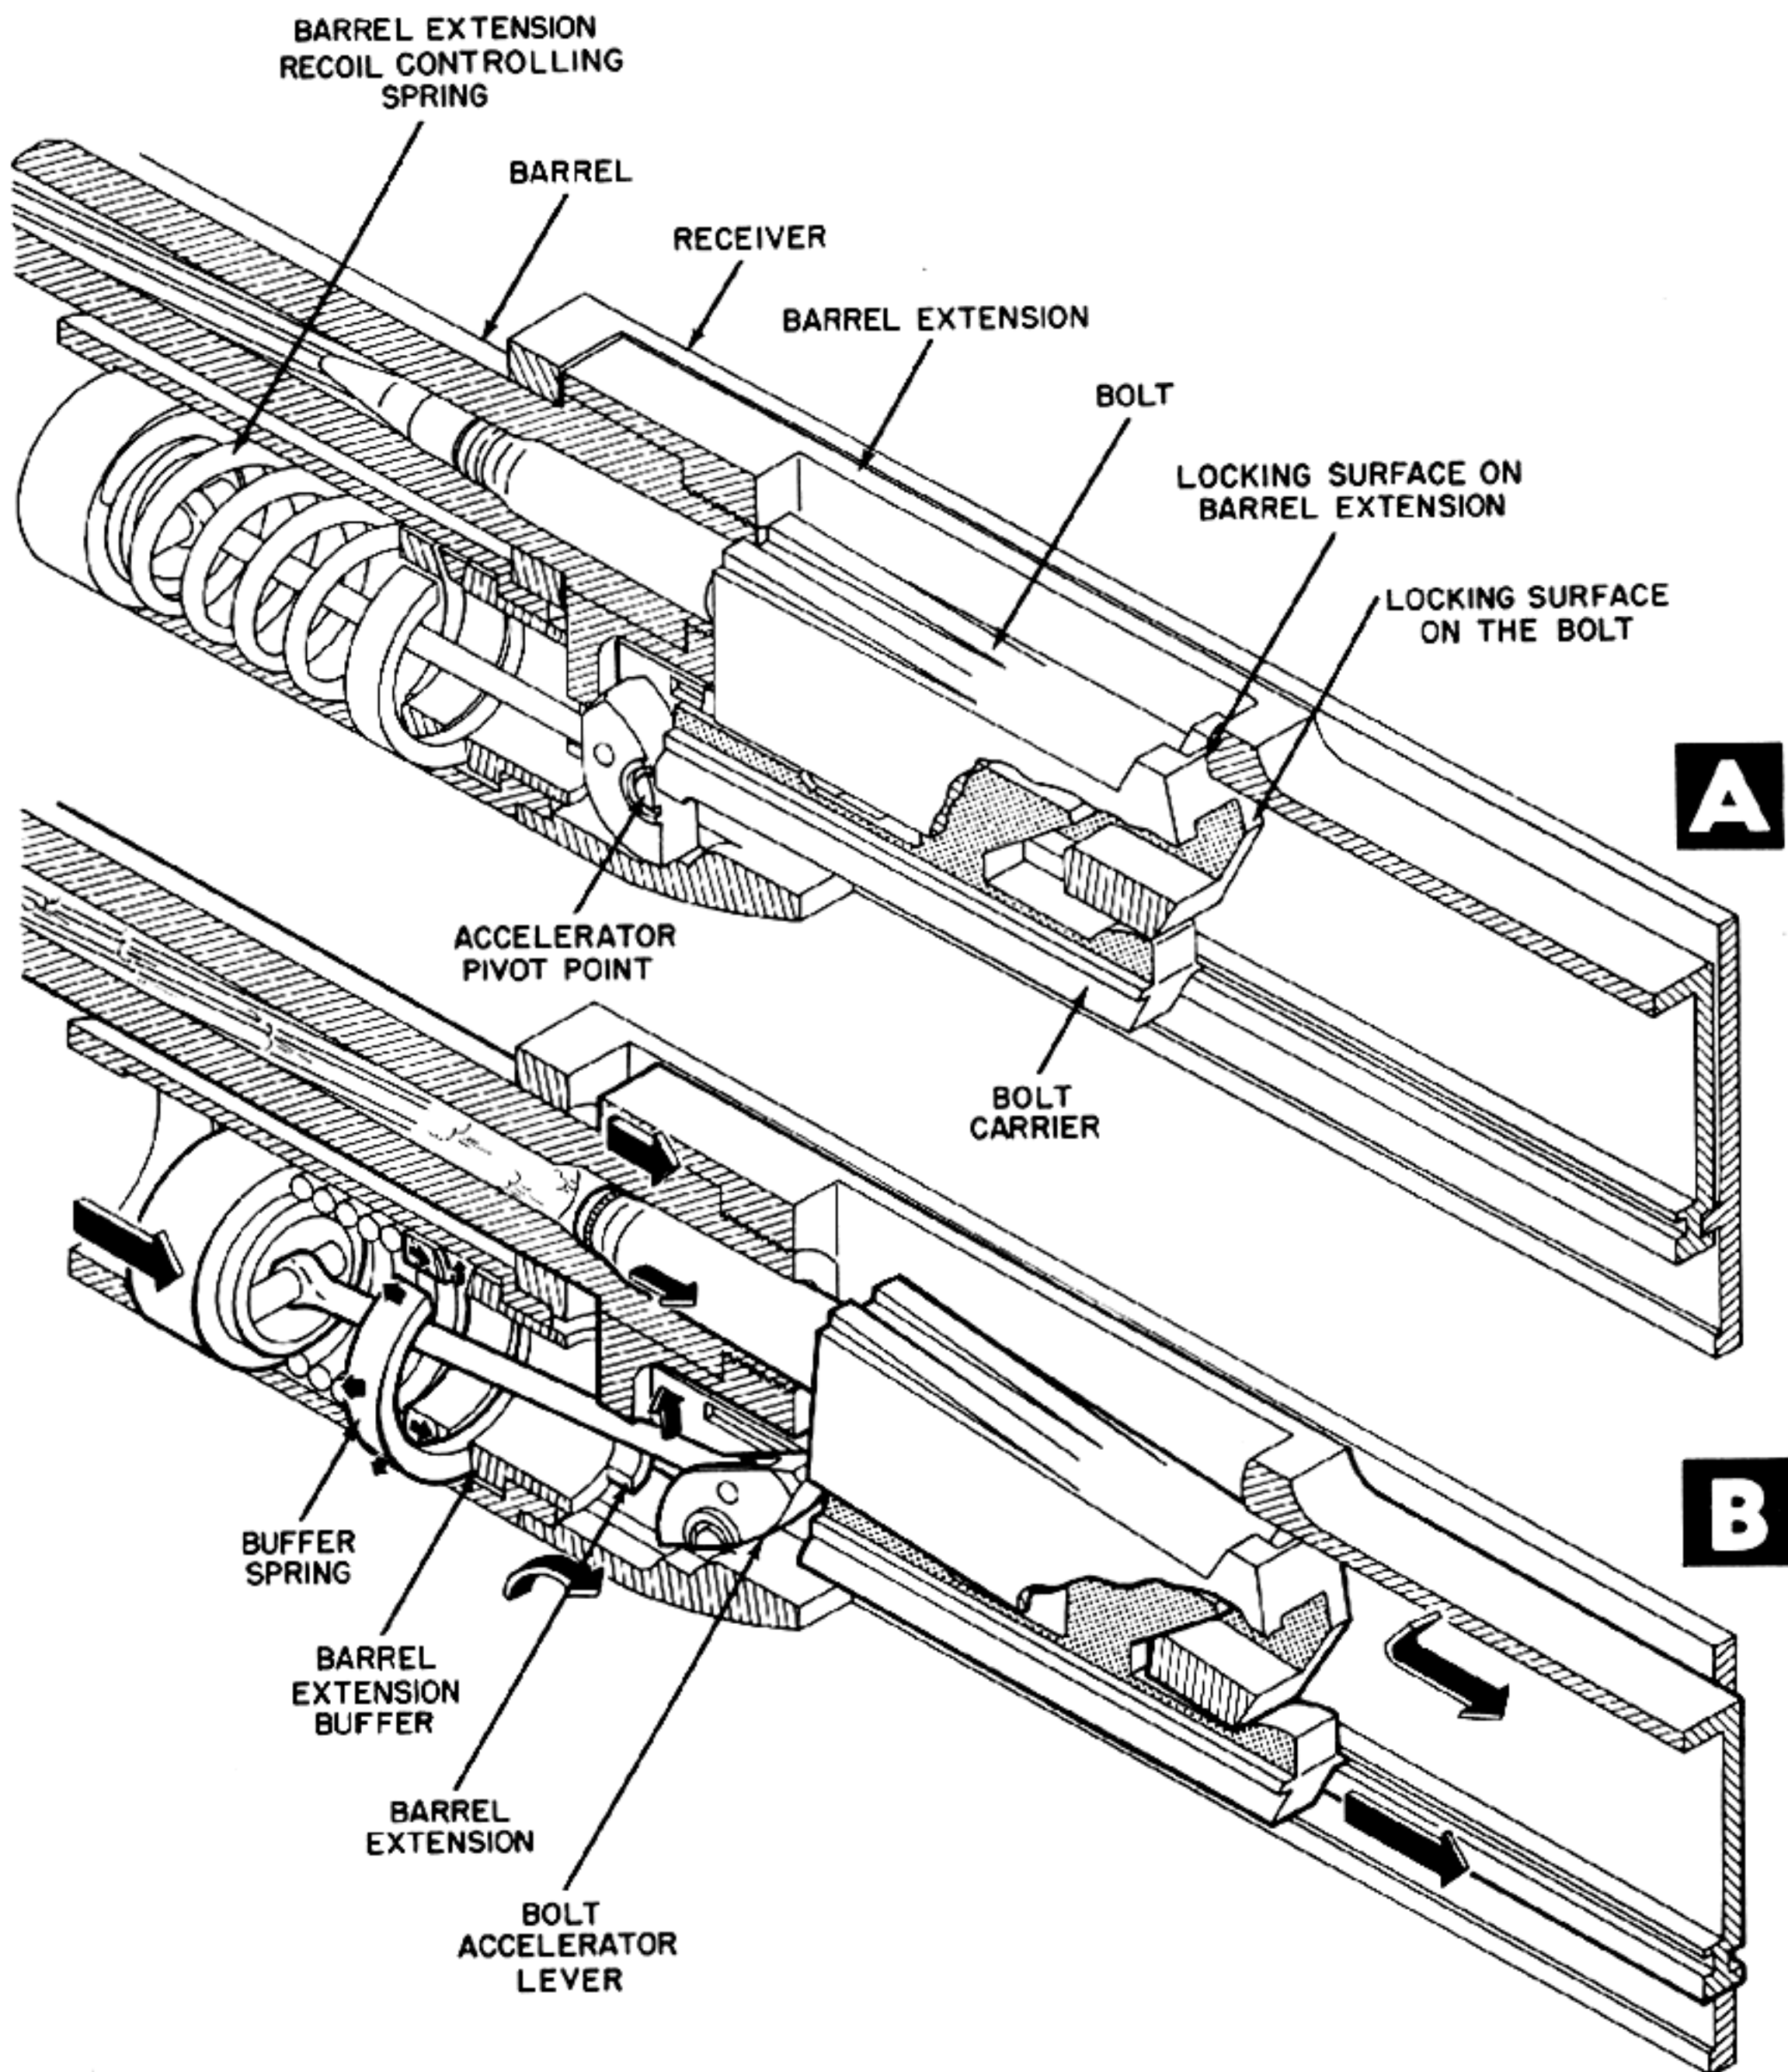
Recoil Operated Accelerator Forces Bolt to Rear and Also Acts as Barrel Extension Buffer.
